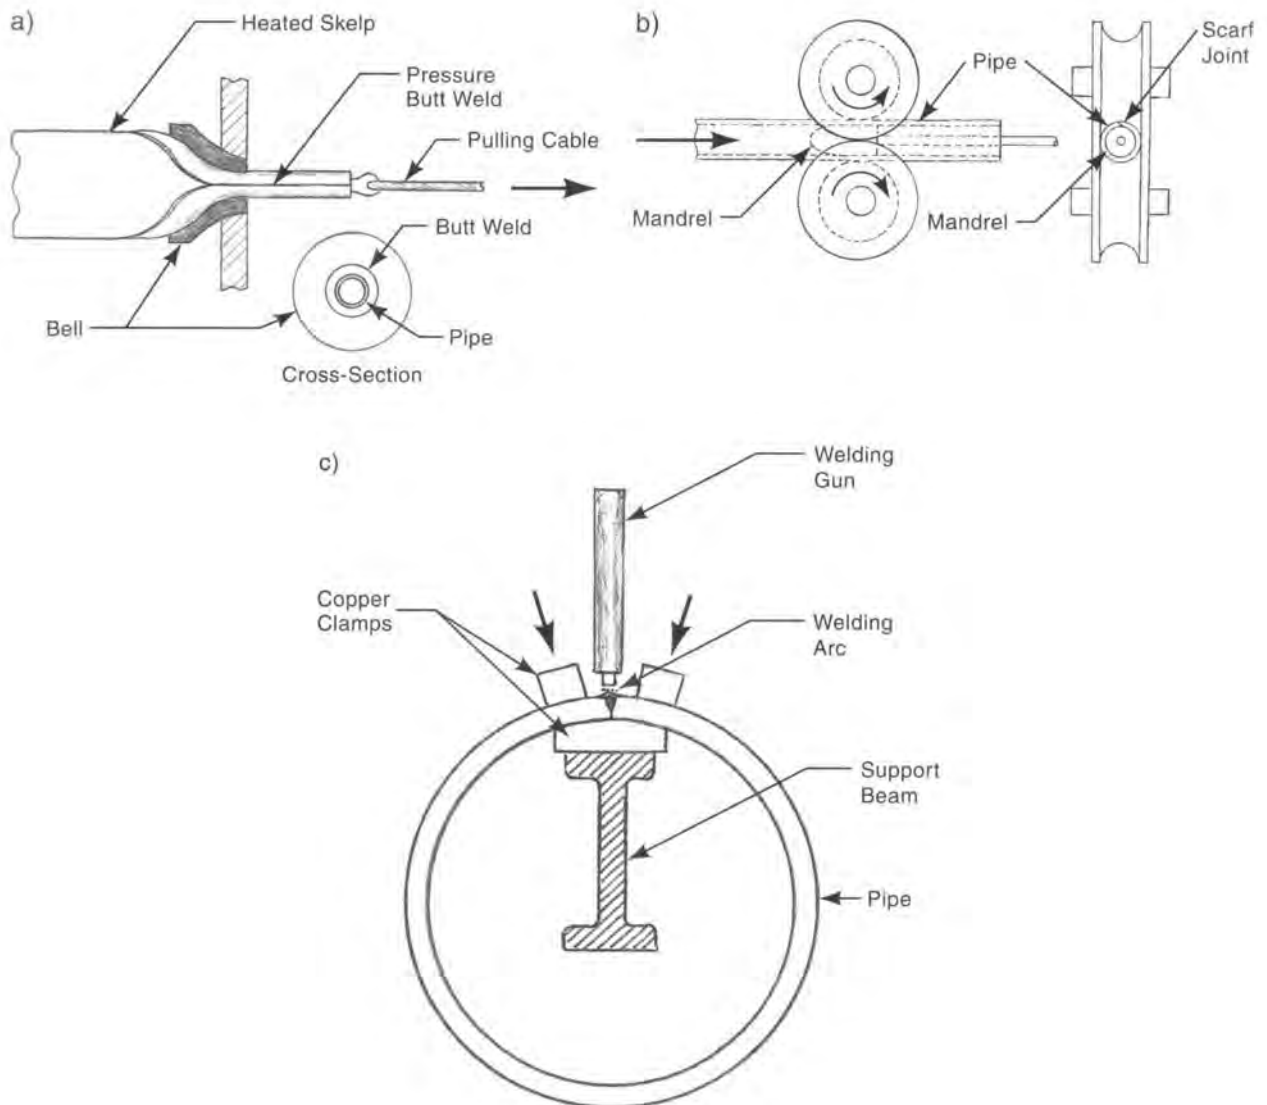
Schematic illustrations of pipe welding methods. a) pipe with a butt-welded seam being made from strip material. b) forge welding. The pipe fed to the machine is red hot and the rollers and mandrel apply pressure to the scarf joint, causing the edges to fuse together. c) arc welding of a large-diameter pipe.
